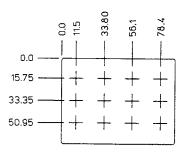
MODULE REAR 12 COMPONENT GRIDWORK, 2 SLOT MODULE
